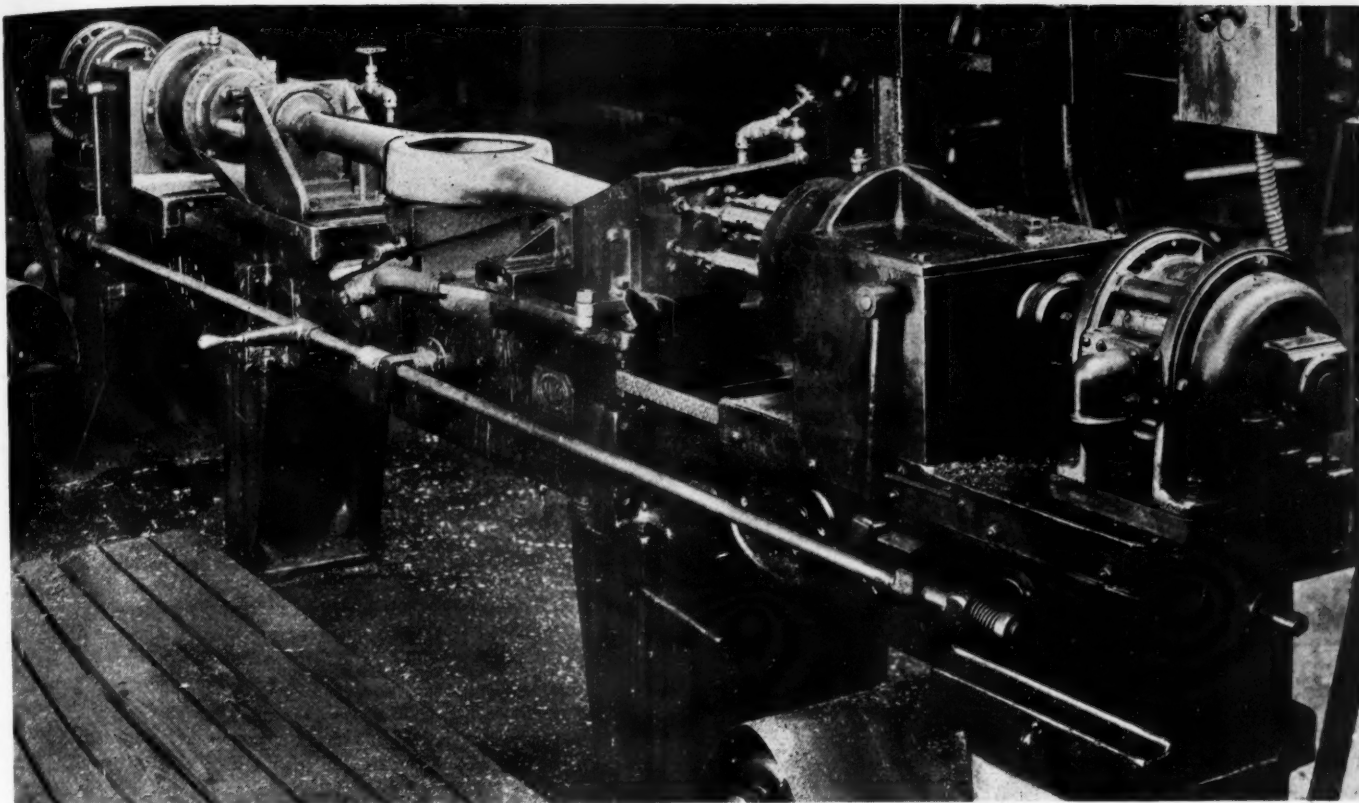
Three motors operate Natco horizontal drill in which flanges are drilled. Two men operate machines shown in this and previous figure
